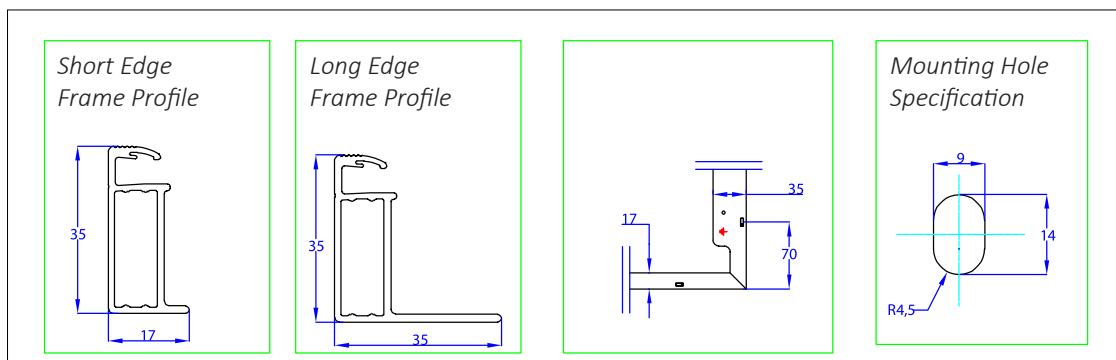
Aluminum (Glass-Glass) 1762/1134
